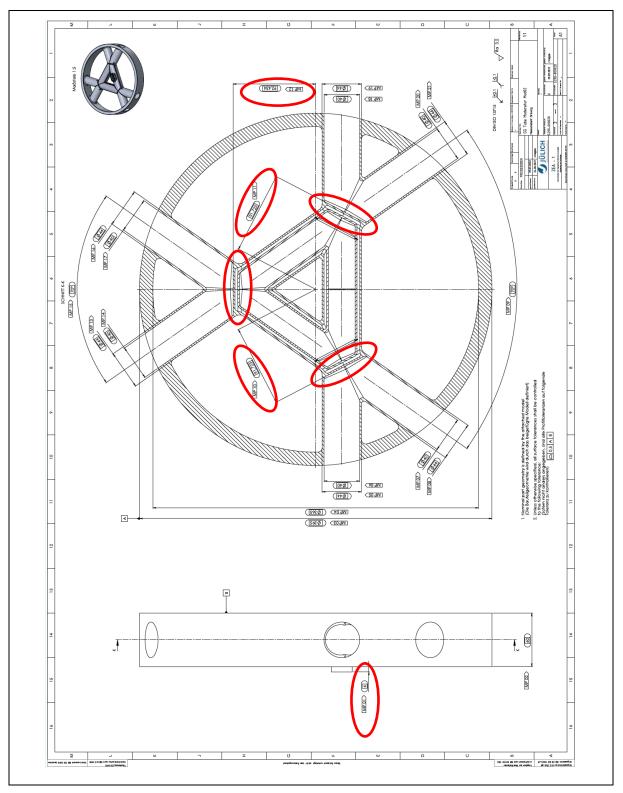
Measurement Drawing S298-00028d - Sheet 3
